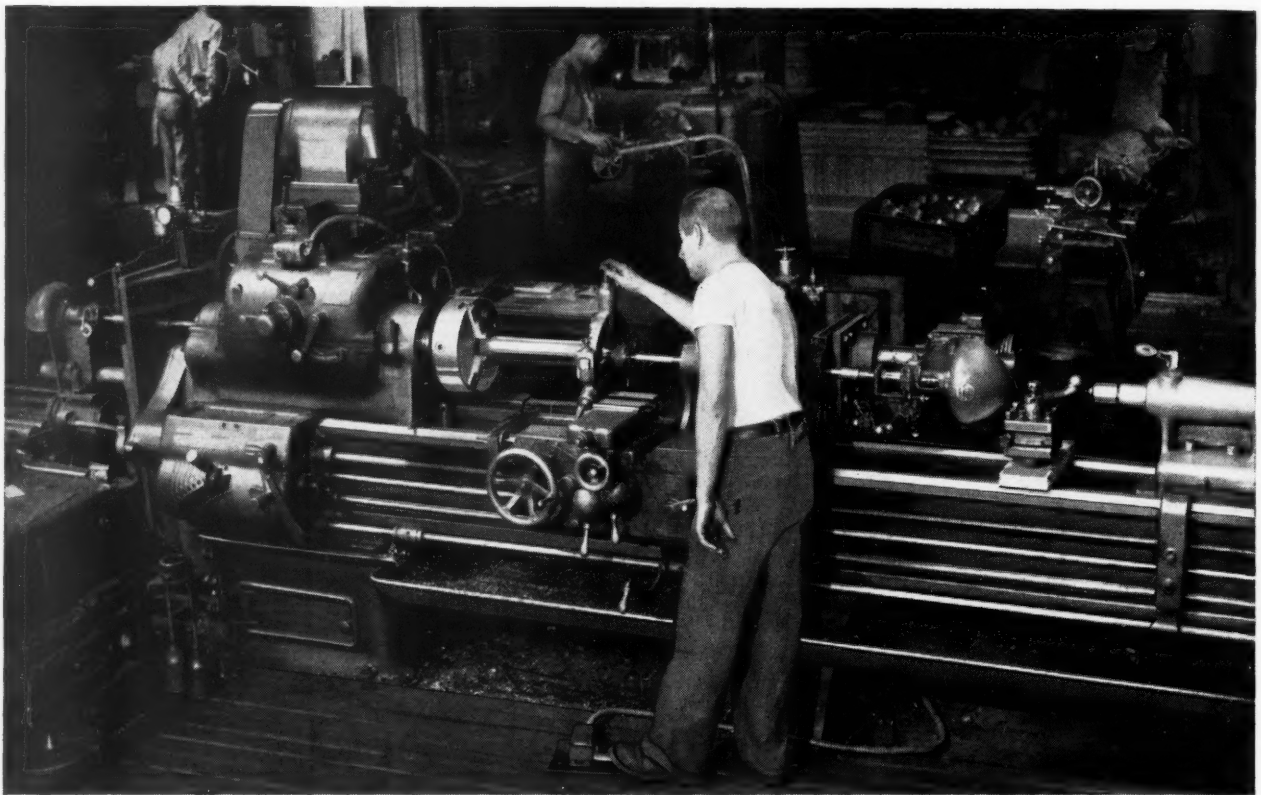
Simple method of converting a lathe into a double-end shaft-centering machine. Two drill heads are employed, one mounted on the headstock and the other on a modified tailstock casting
